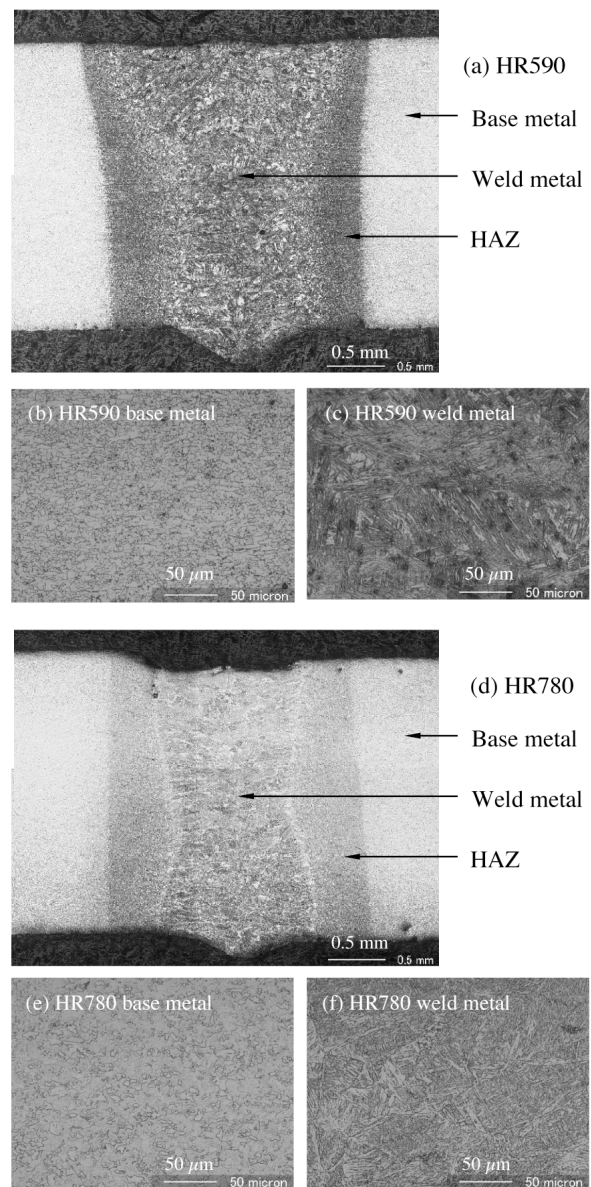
Micrographs of welding part and metallographic structures of base metal and weld metal.
